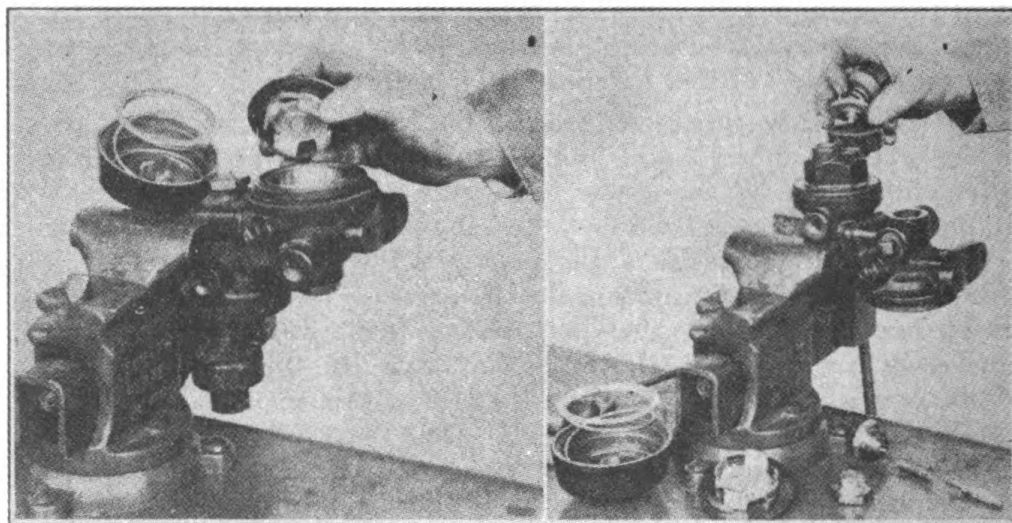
REMOVING DIAPHRAGM IN GUIDE RING
